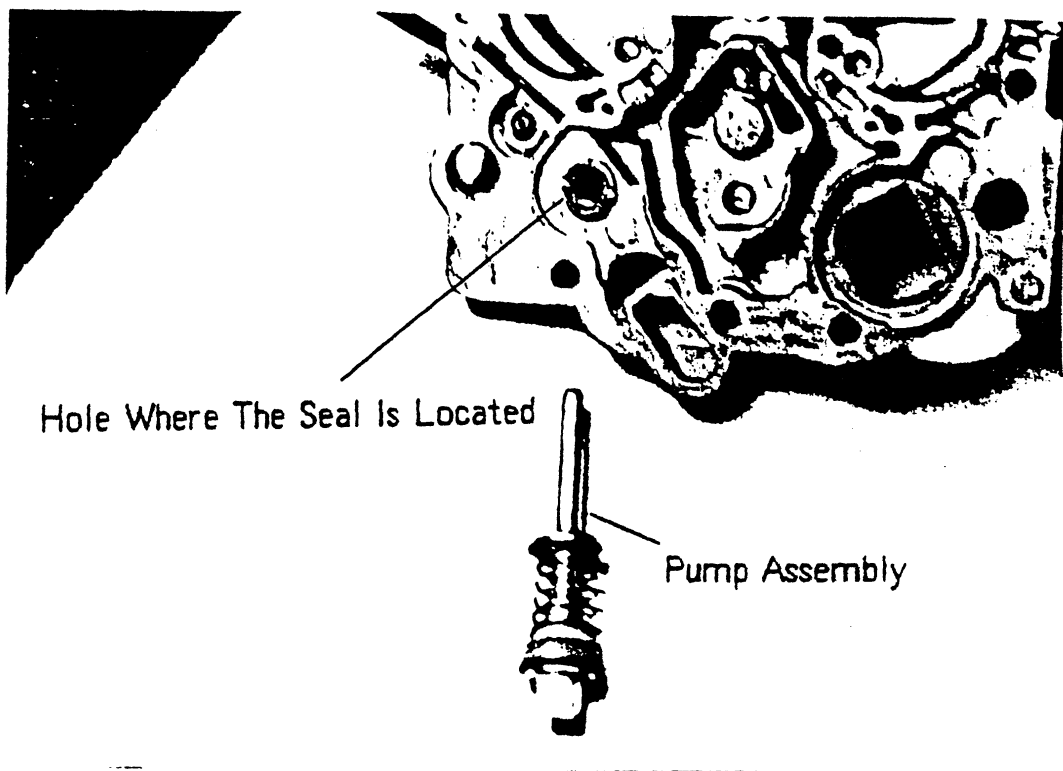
a. Pump Assembly And The Hole It Is Inserted
